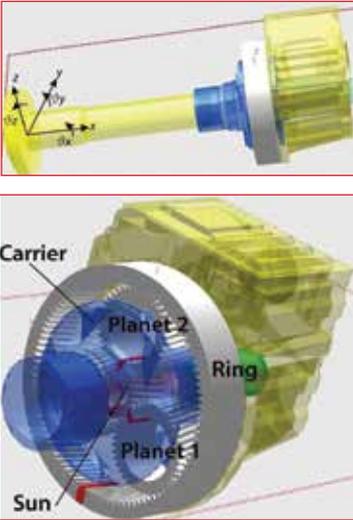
(a) Side view and (b) axial view of the multi-body model of the examined gearbox with flexible carrier and housing.
